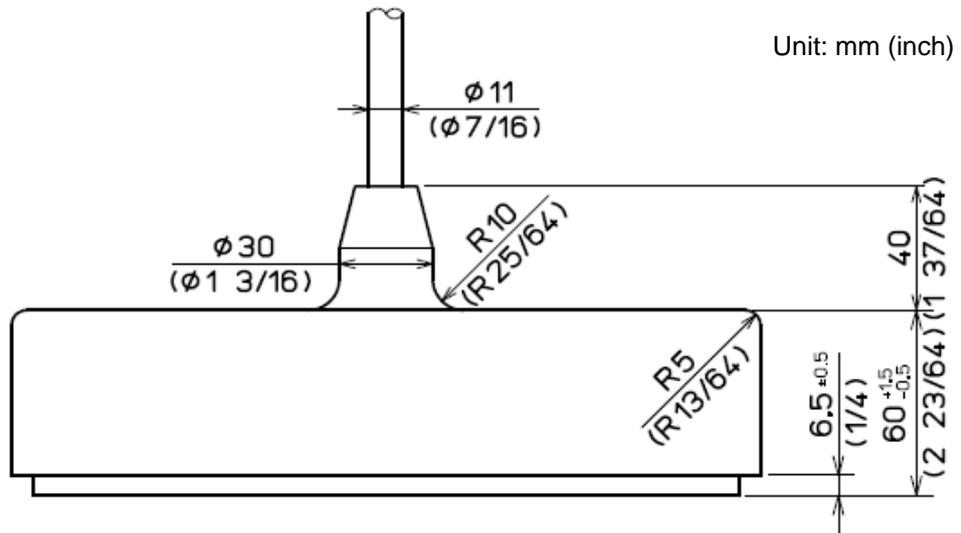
Outline dimensions of a transducer (TD-754)
